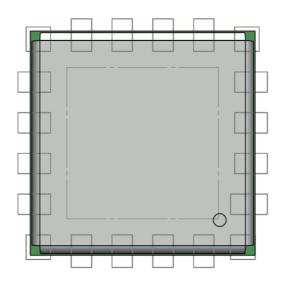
MODULE HOSTED ON FOOTPRINT
